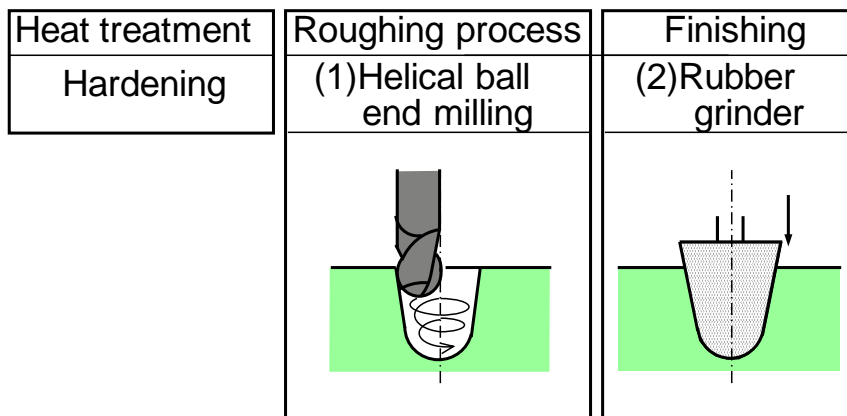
4 Hard machining of a tapered hole by helical feeding of a slender ball end mill.
